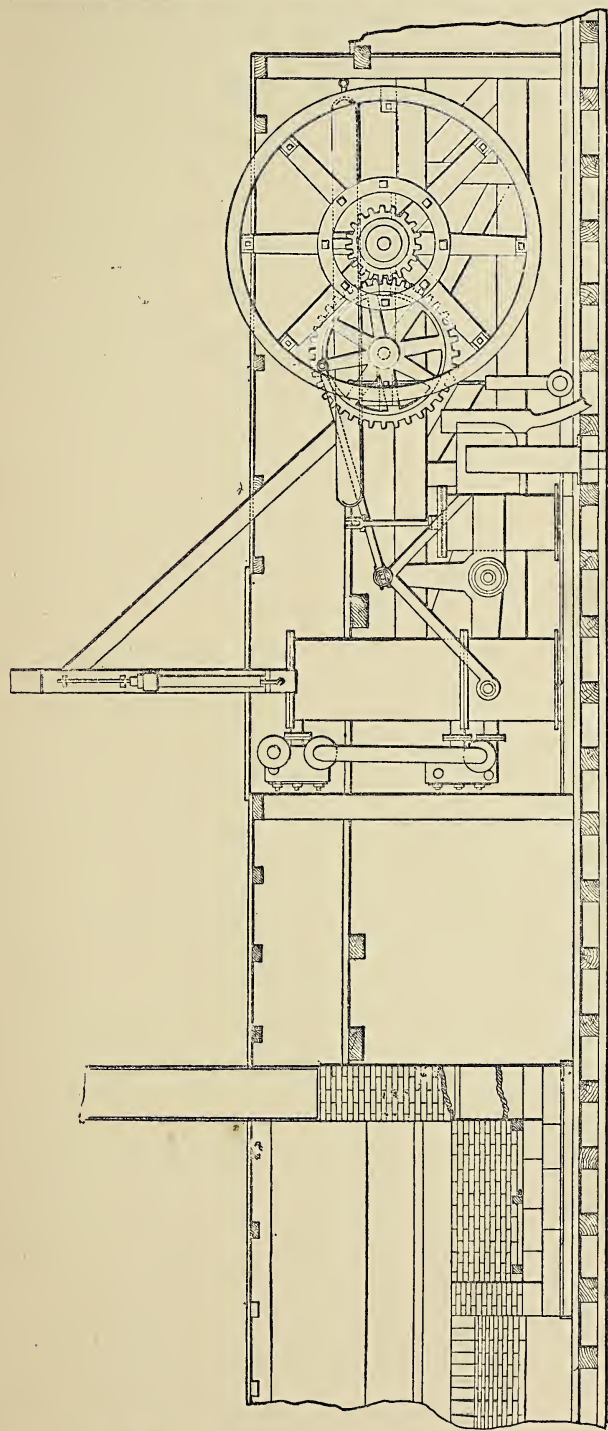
Engine and Boiler of the River Steamboat "Clermont," built in 1807, from Drawings by Fulton.
